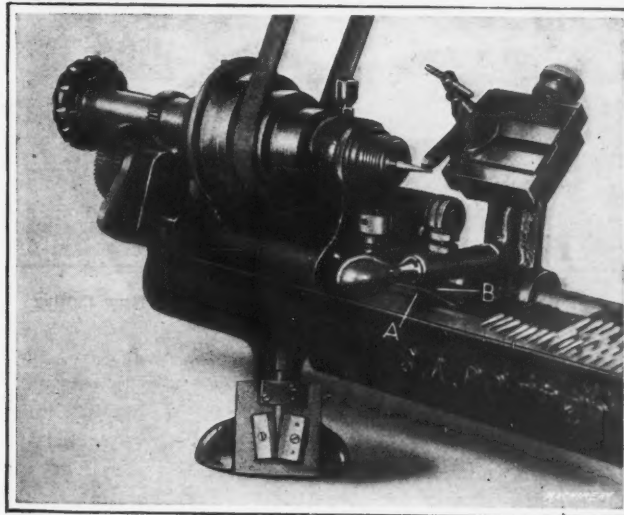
Bench Lathe set up for threading Sharpener Tool shown in Fig. 1
